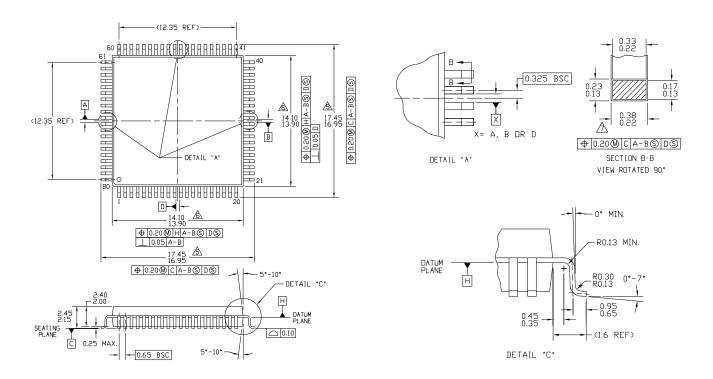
Example of 14 x 14 mm LQFP Case Outline Drawing
